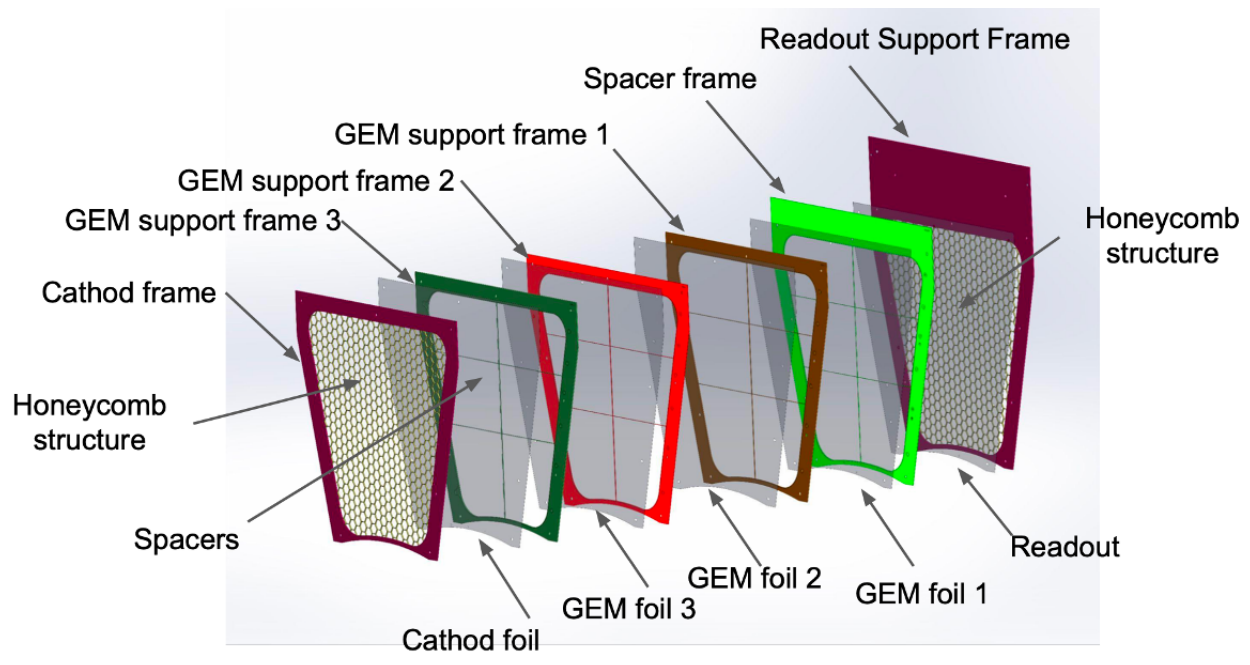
Exploded view of single GEM module showing the three GEM foils and their support frames, the support frames for the cathode plane and for the readout board, and the lightweight honeycomb structures.
